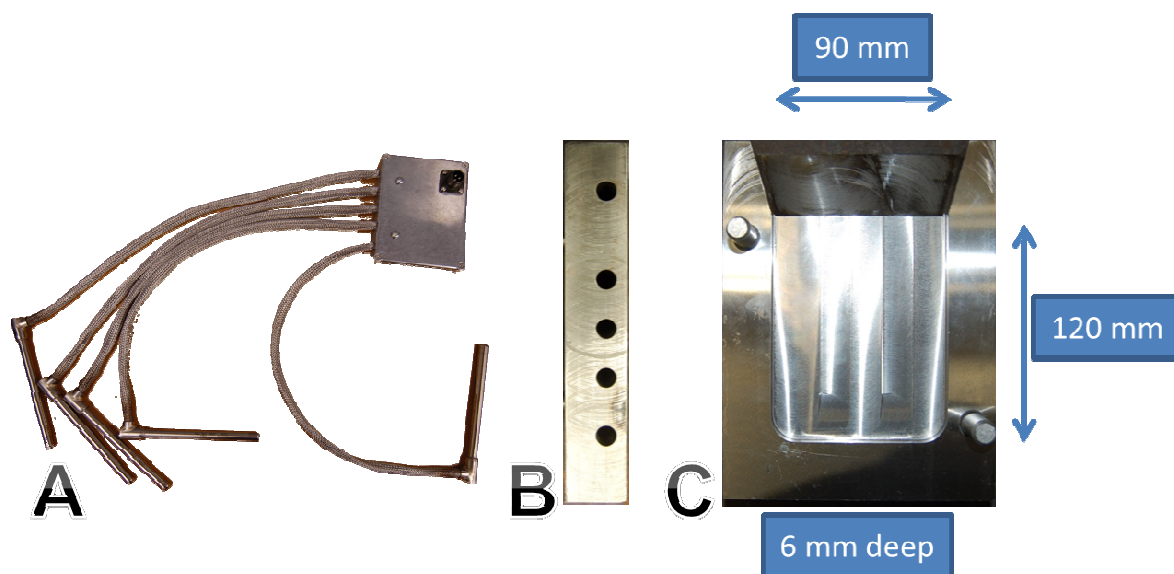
(A) One of two cartridge heater units, (B) side view of mould with holes for cartridges, (C) male-half of heated mould with dimensions.
